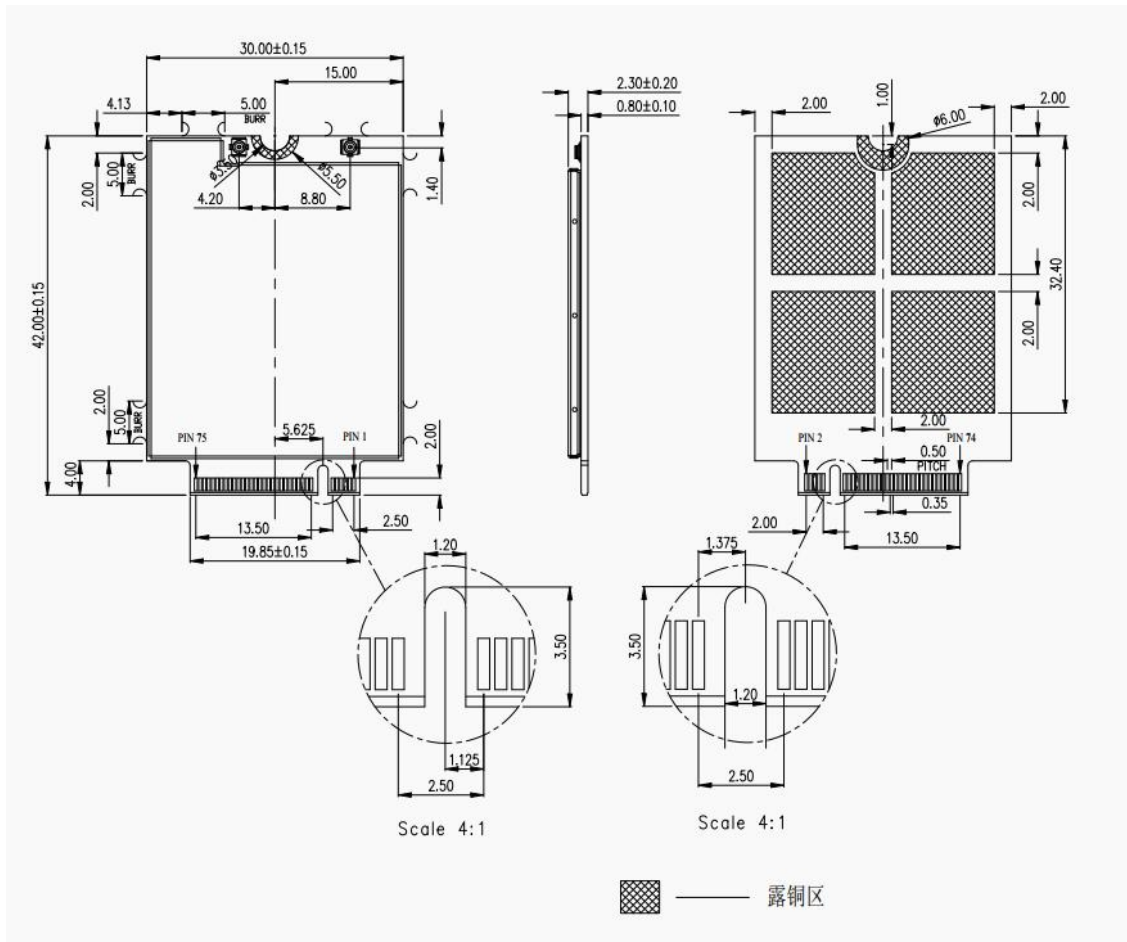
Dimensions of SIM6600-eM2 (Unit: mm)
